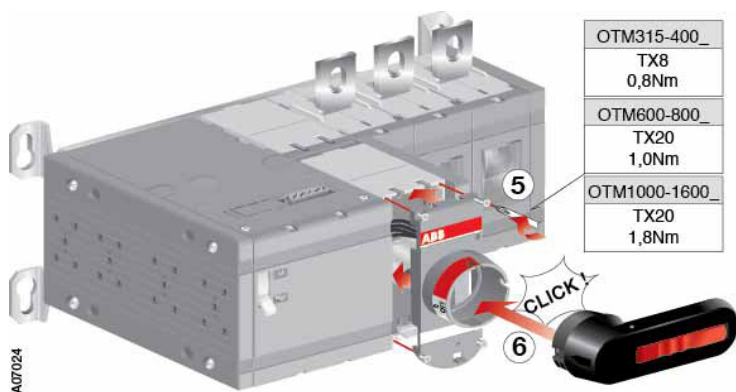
Closing the mechanism cover after the mounting of the Test auxiliary contacts on the switch mechanism
